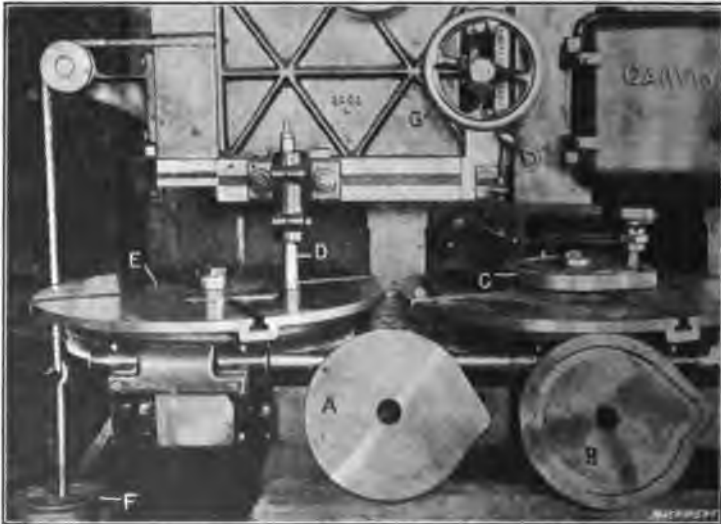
Milling Face Cam on Garvin Cam or Form Milling Machine
